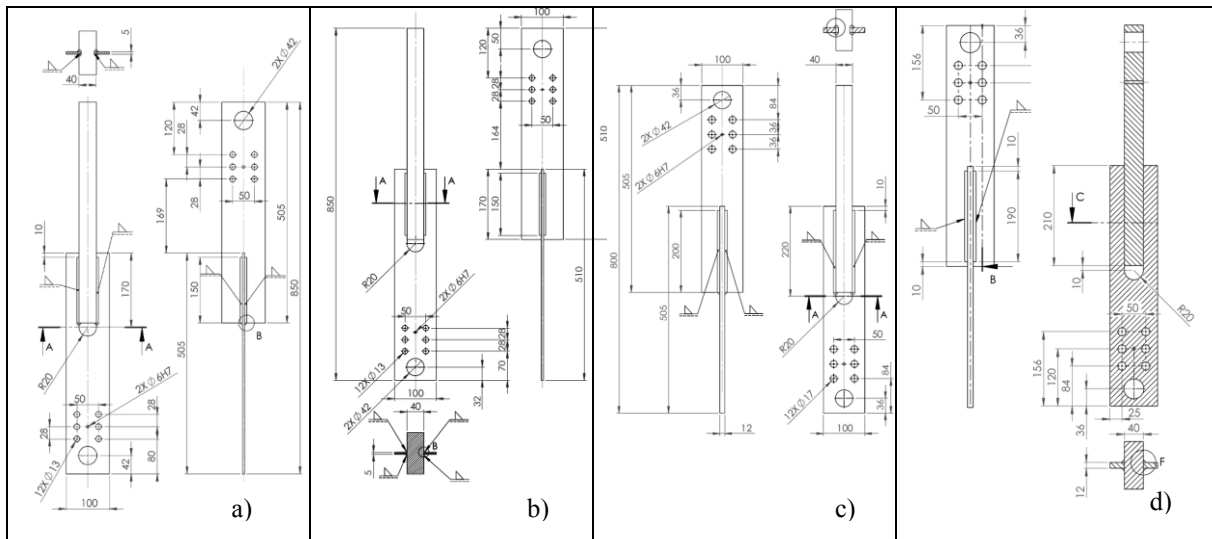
Welded specimens geometry: a) welded specimens with the same weld configuration of the bridge detail and a thickness of 5 mm (W1 series); b) welded specimens with a weld configuration according to EC3 and a thickness of 5 mm (W2 series); c) welded specimens with the same weld configuration of the bridge detail and a thickness of 12 mm (W3 series); d) welded specimens with a weld configuration according to EC3 and a thickness of 12 mm (W4 series).
